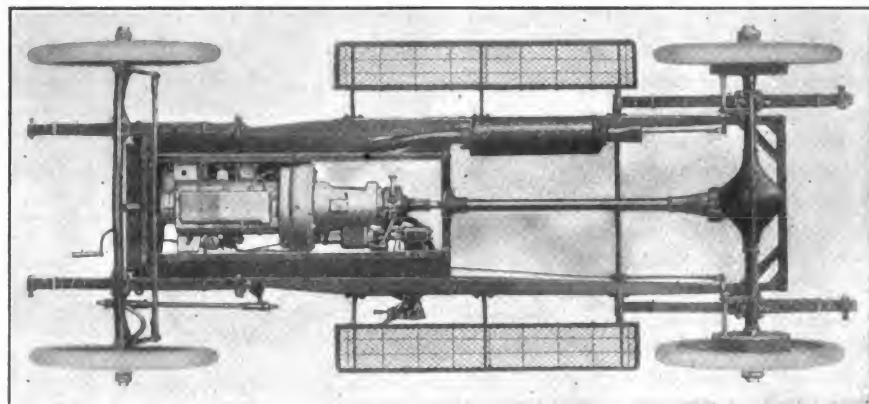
A TOP VIEW OF THE CHALMERS CHASSIS
